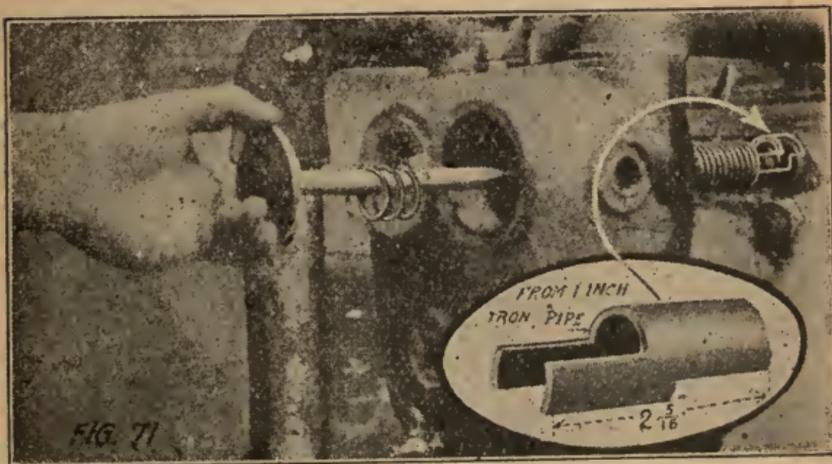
2d. Remove valve spring by turning engine over until the spring is compressed to its utmost. Place a short piece of gas pipe (sawed as per illustration) between the spring and crank case to hold spring in a compressed condition, then turn motor over until the key can be removed from the valve stem. It is not necessary to remove the spring when grinding.
